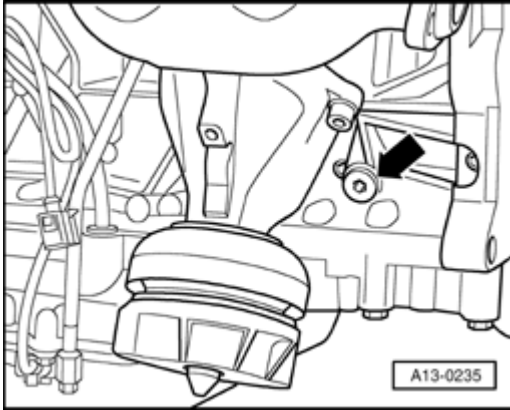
Removing Locking Bolt Of TDC Marking At Upper Part Of Oil Pan
